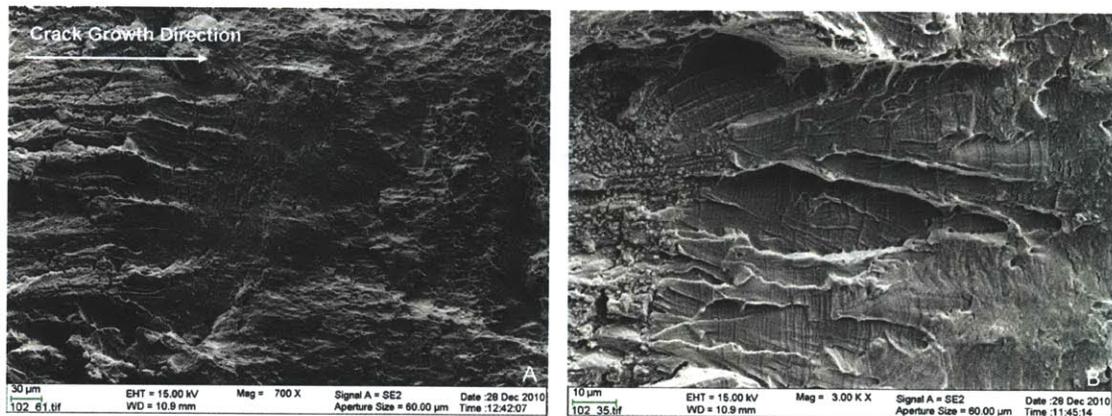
Fracture toughness fractography from an as-welded low-ferrite material tested in-situ. A) Overview of the entire fracture toughness test, showing the brittle zone and shear fracture. B) High magnification of the brittle fracture occurring prior to crack-tip blunting.
